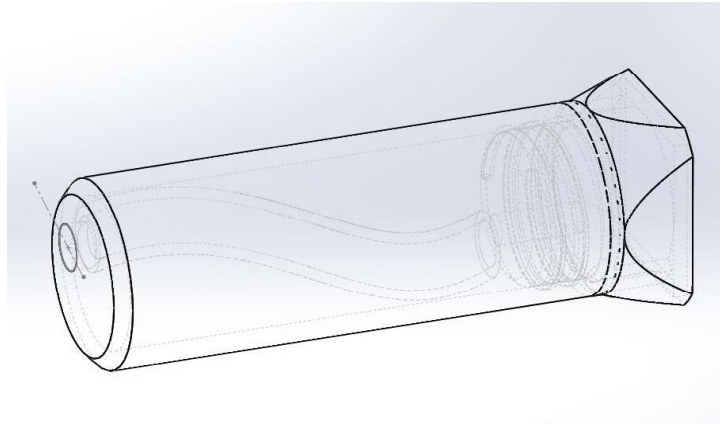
The adapted “Tube” CAD model to include a spiral tube instead of a straight microphone tube. As mentioned, the spiral takes up much of the internal space for batteries and electronics. In future iterations, an extra threaded part should be made at the bottom end of the HHD as well as where the speaker is mounted for ease of electronics placement.
